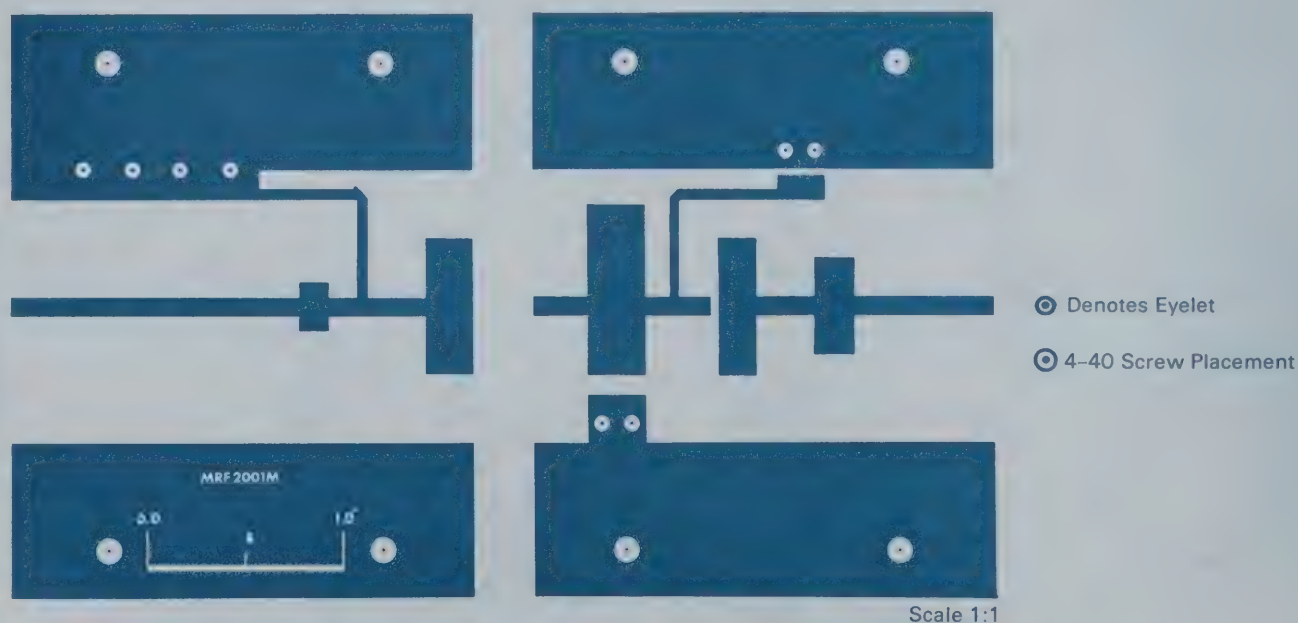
PRINTED CIRCUIT BOARD LAYOUT — 2.0 GHz TEST CIRCUIT
